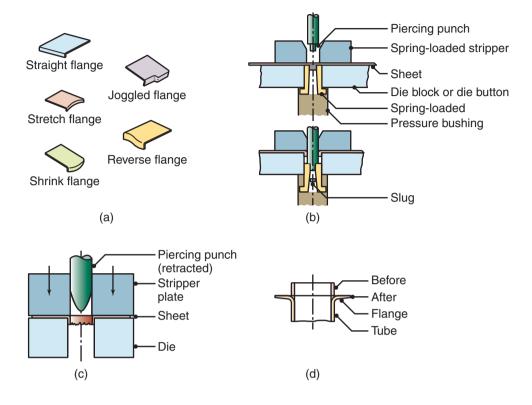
Various flanging operations. (a) Flanges on flat sheet. (b) Dimpling. (c) The piercing of sheet metal to form a flange. In this operation, a hole does not have to be pre-punched before the punch descends. Note, however, the rough edges along the circumference of the flange. (d) Flanging of a tube; note the thinning of the edges of the flange.
